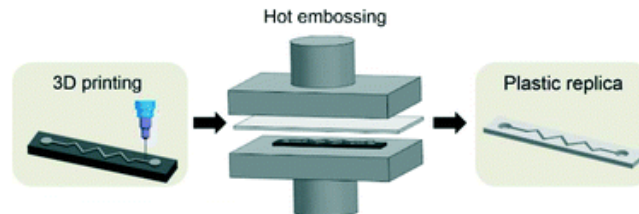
This figure shows the simplified steps of Hot embossing microfluidic chips with a 3D printed mould [16].
